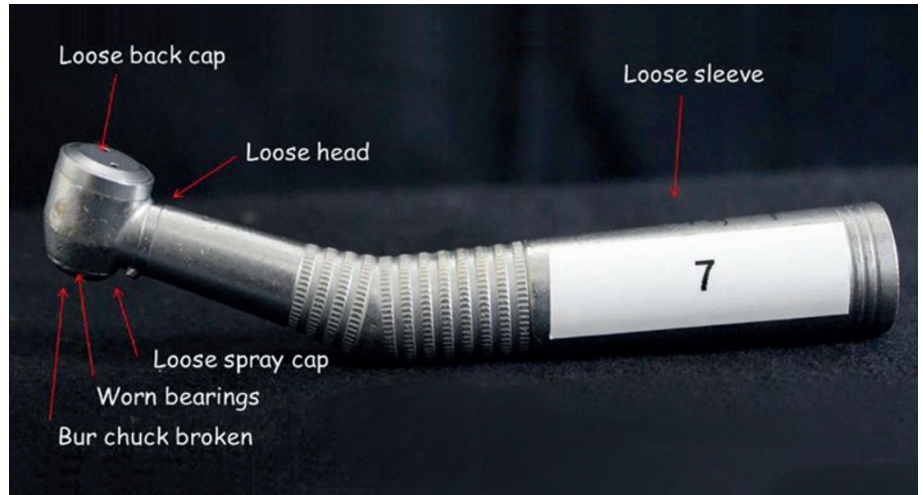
Six handpiece faults highlighted on an air turbine handpiece
